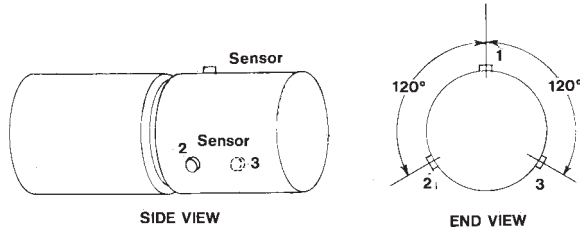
Typical Sensor Placement for Three-Channel AE Monitoring of a Circular Weld
